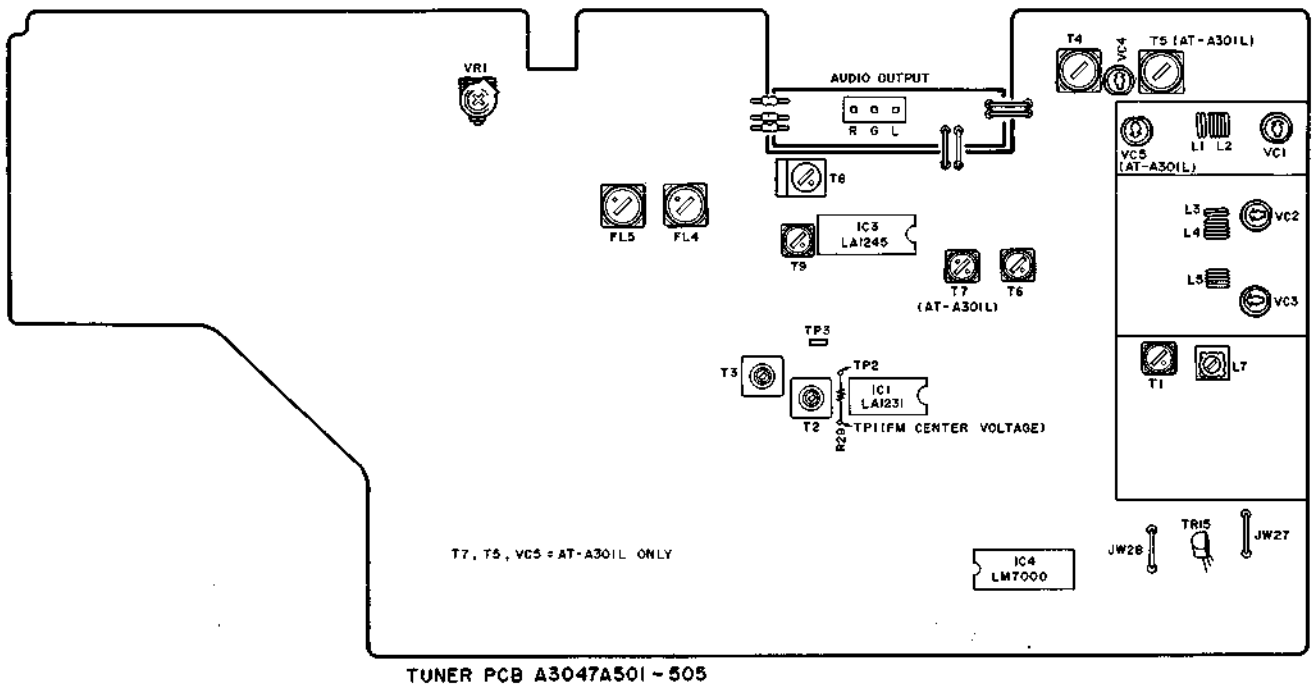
TUNER PC BOARD ADJUSTMENT POINTS
